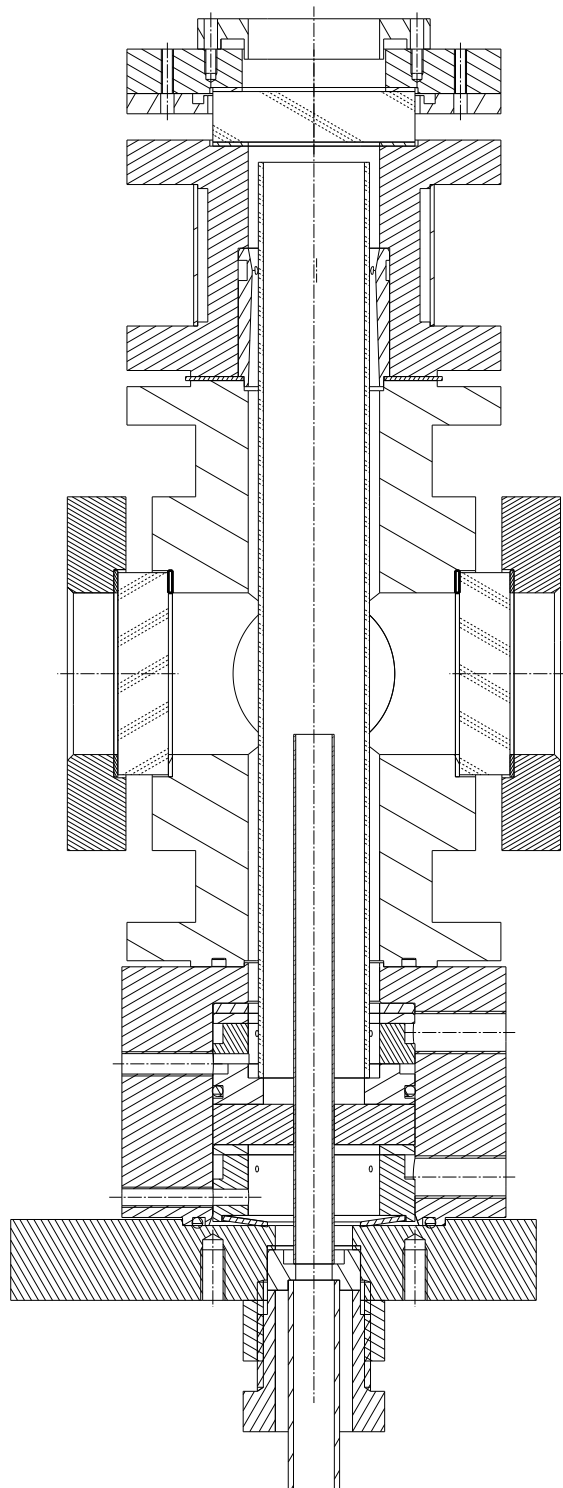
Cut through the assembly drawing of the high-pressure burner.
